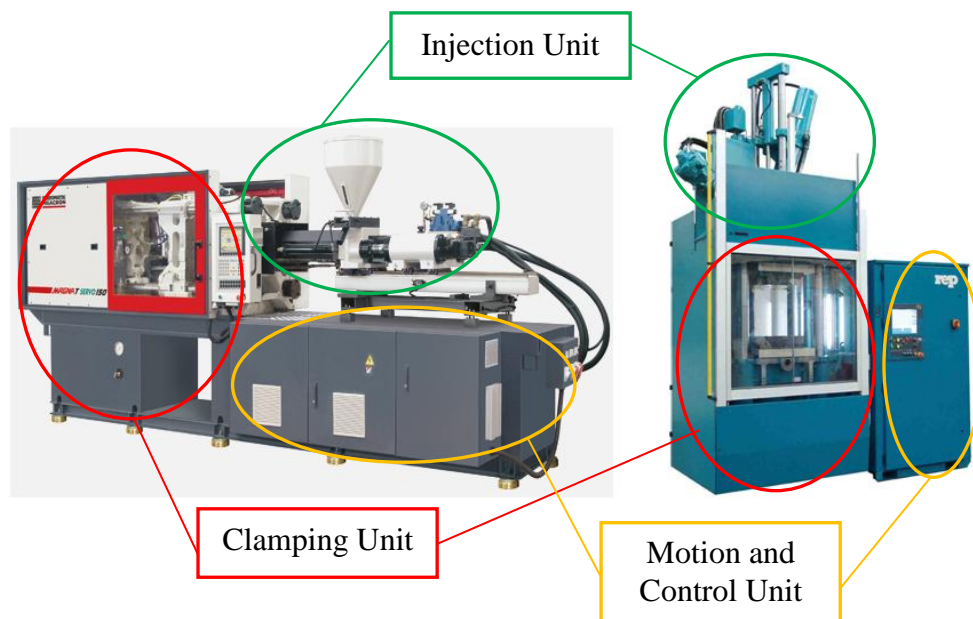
Injection Moulding Machines: Ferromatik Milacon on left-side, from [6], REP - Rubber in Motion on right-side, from [7]
